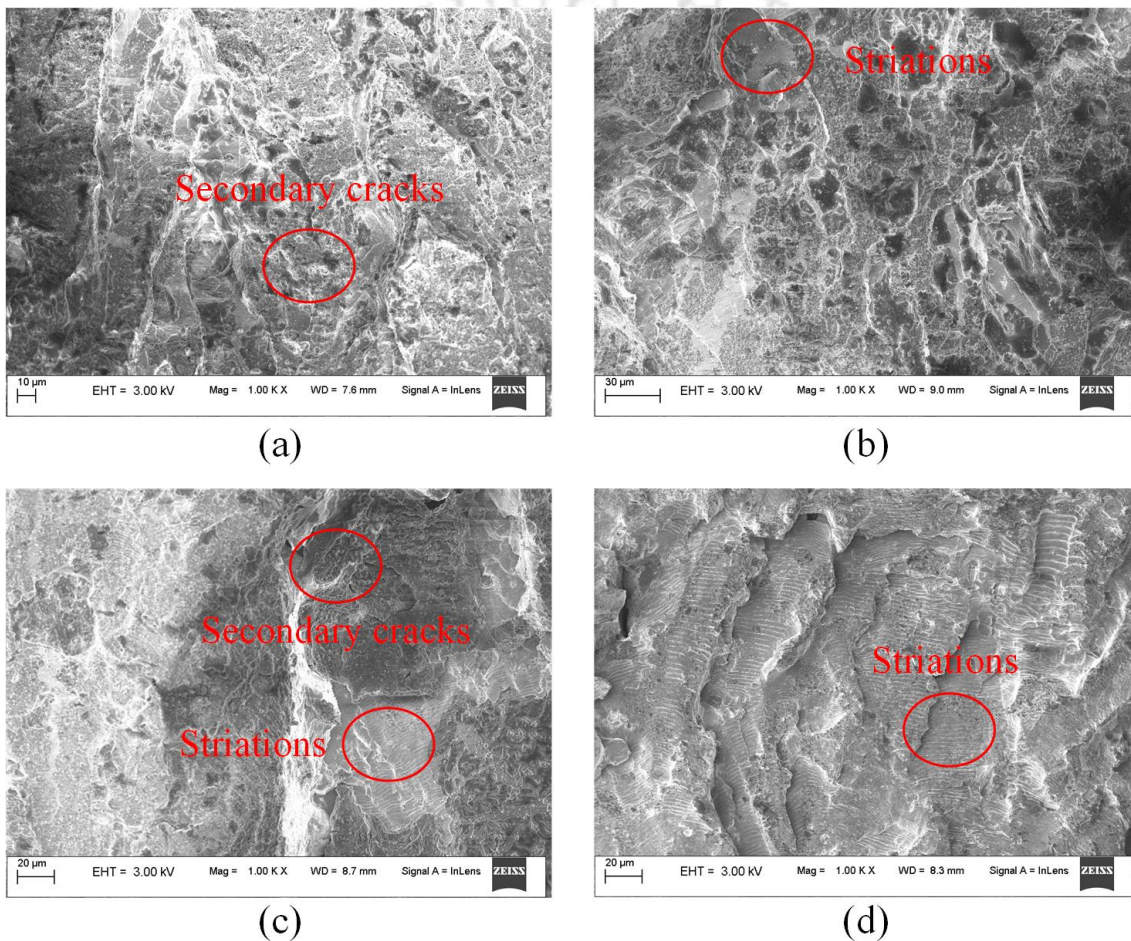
Fractographs of the mixed mode 45° CTS specimen showing the fractured surfaces at different crack lengths (a) 45.4 mm (b) 51.6 mm (c) 55.2 mm (d) 57.7 mm
